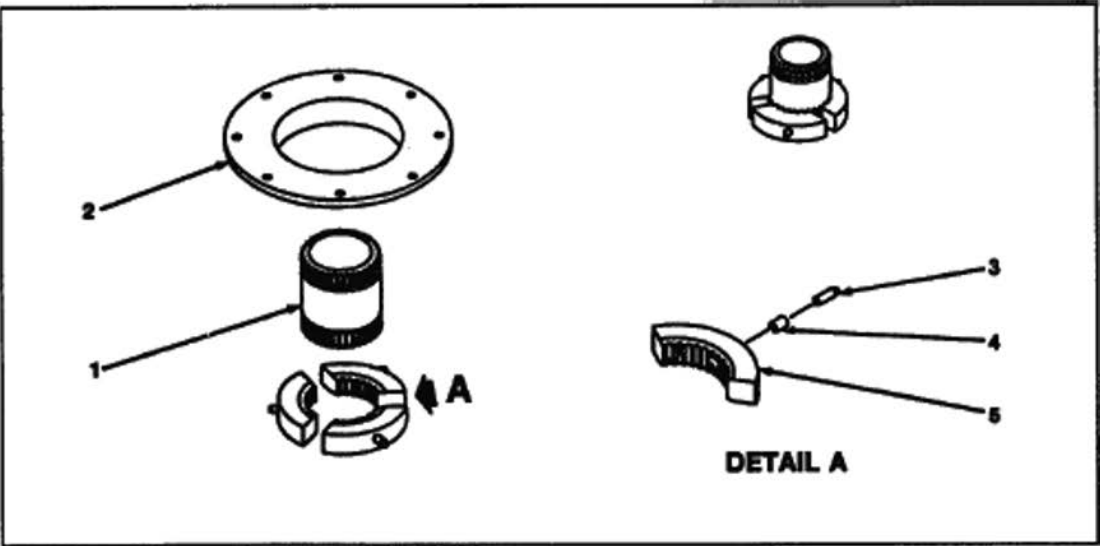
Main Gearbox Planetary Assembly Torque Wrench Reactor
